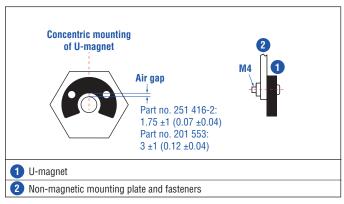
Mounting of U-magnet (part no. 251 416-2)
